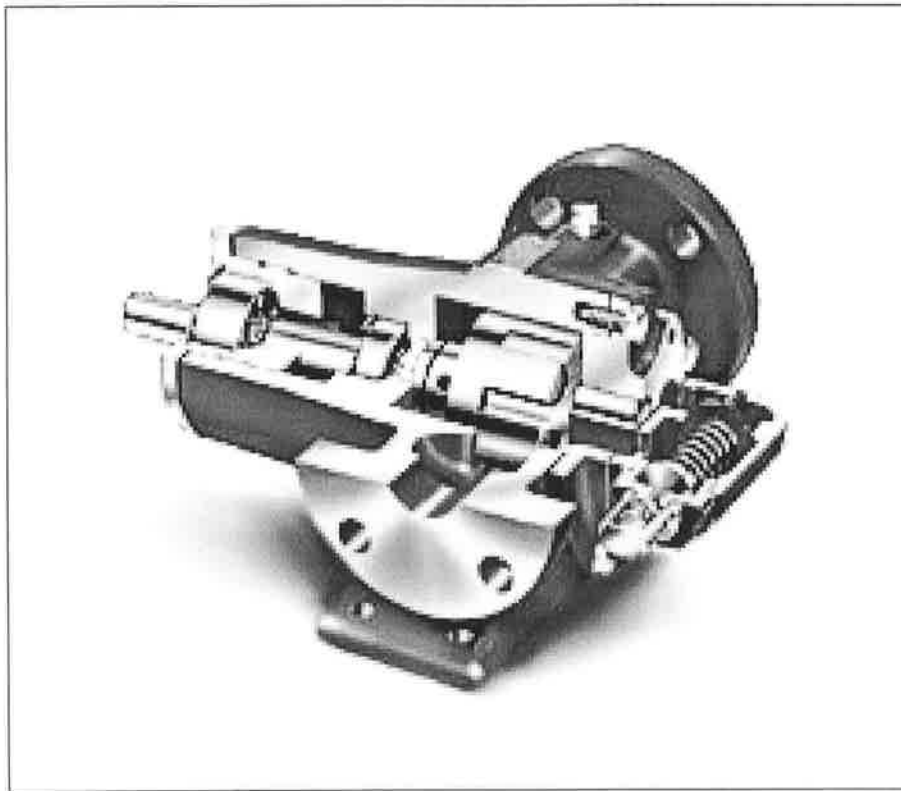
A corrosion-resistant 316 stainless steel pump [181].
